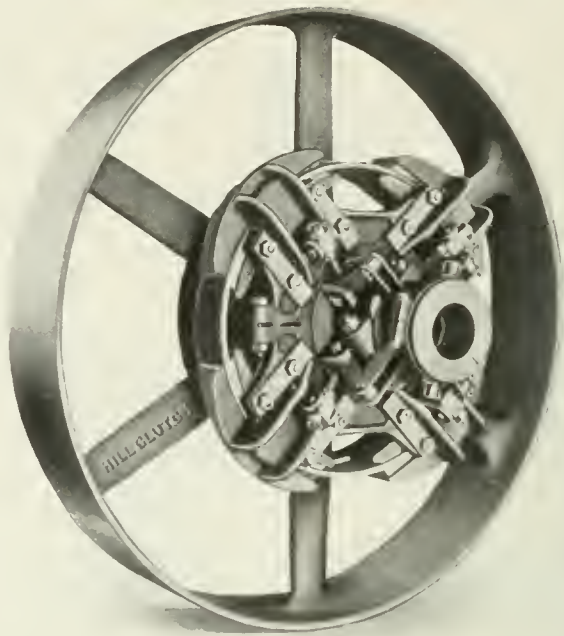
Friction Clutch built by the Hill Clutch Co.—Four-arm Type
